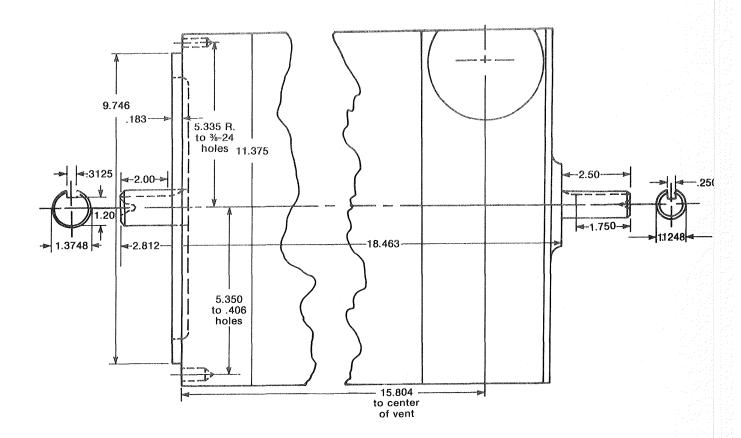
Outline Drawing of Prestolite MTC-4001 Motor
